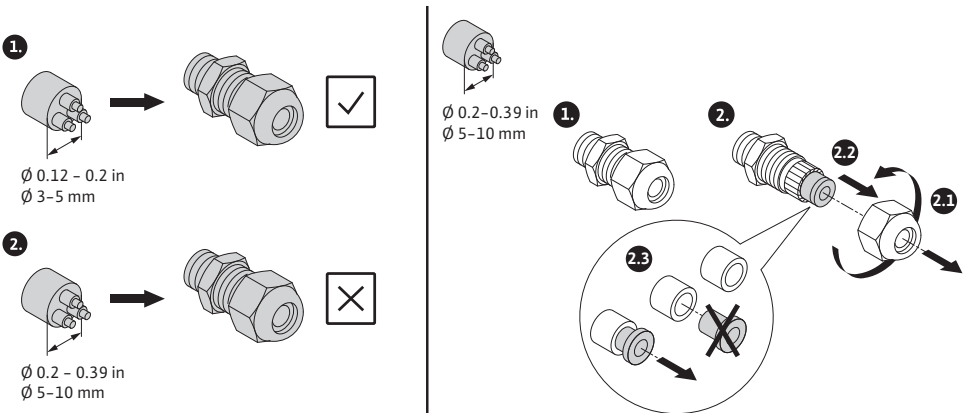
Threaded cable gland  $\varnothing$  0.2-0.39 inches
